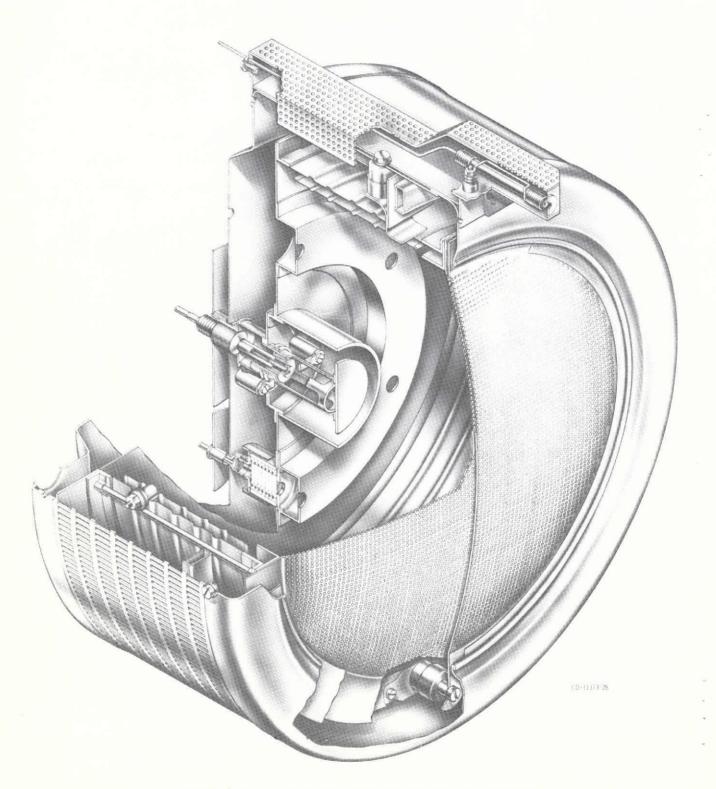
CUTAWAY DRAWING OF 30-CM THRUSTER
